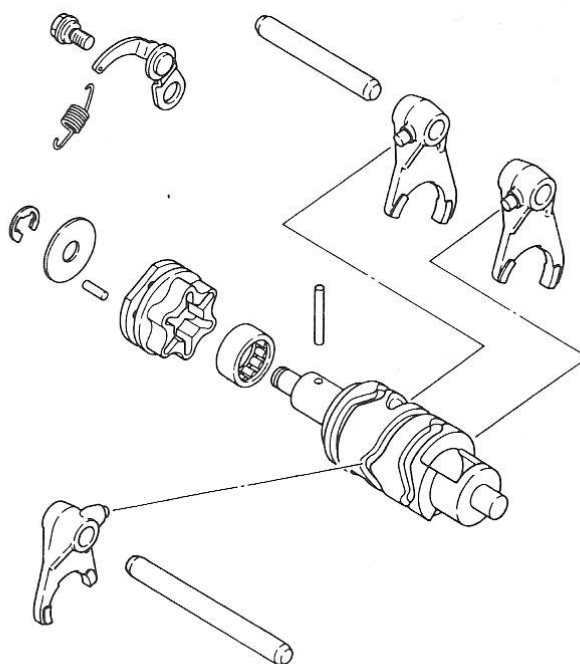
A.21 YT 125/175 shift drum components — exploded view (Sec 3)
